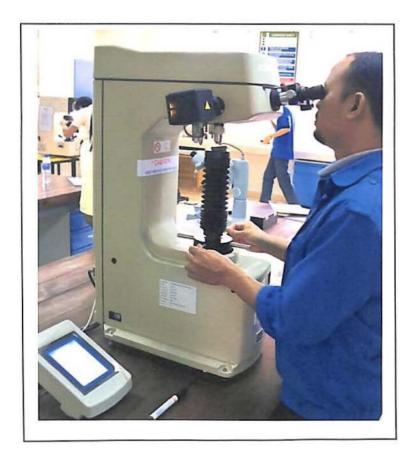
Hardness Testing Machine used for testing hardness of cast iron sample. (School of Mechanical Engineering, Engineering Campus, USM, Penang)
